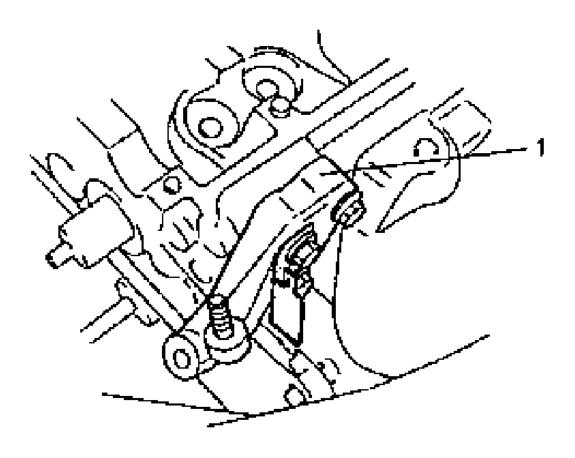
Removing Engine RH Mounting Bracket Courtesy of SUZUKI OF AMERICA CORP.
